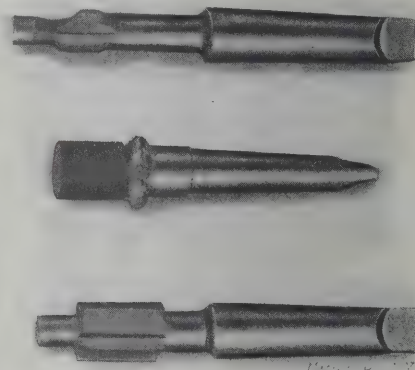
Broken Counterbore Repaired by Electric Welding
